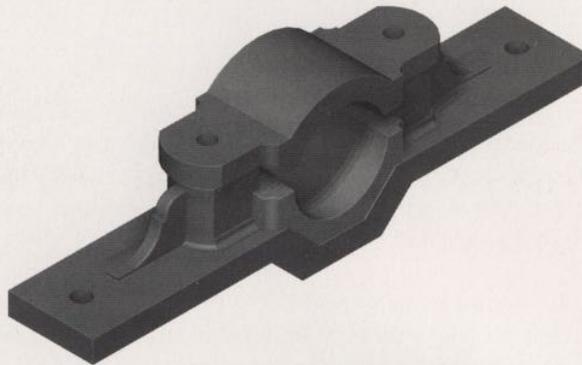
An example of one of the parts reconstructed in AutoCAD from data recorded by divers. This bearing would have been one of four that supported *Heroine's* two paddlewheels. Image: G. Grieco
